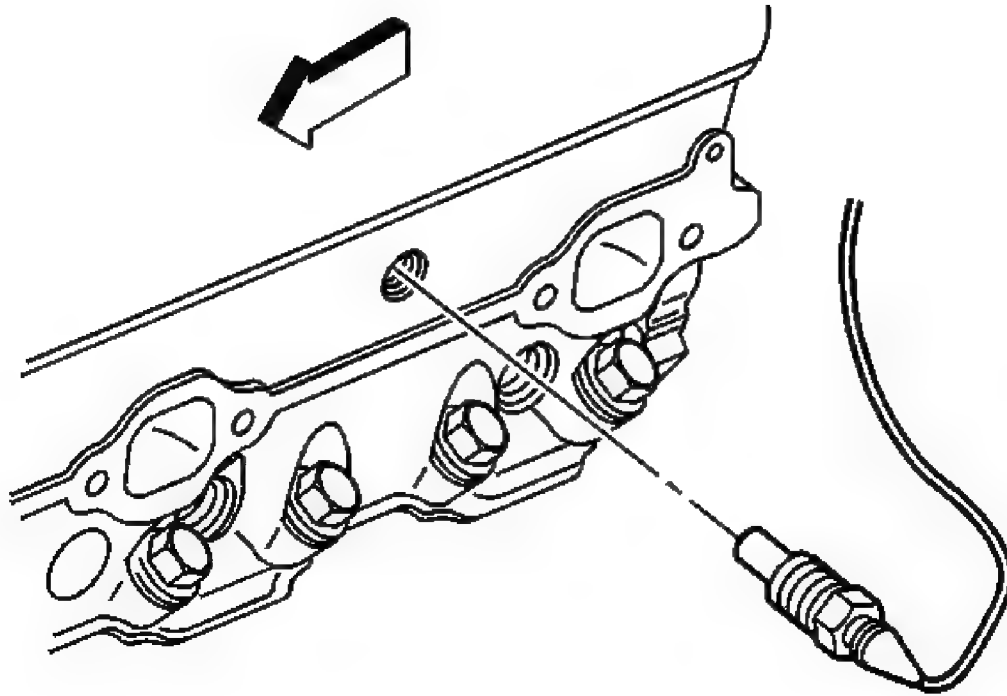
View Of Engine Coolant Temperature Gage Sensor
